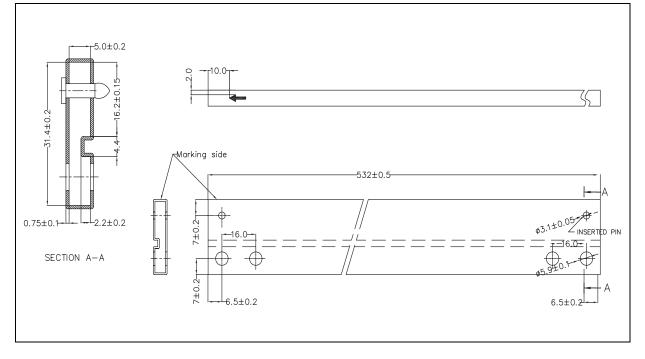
Drawing dimension tube for TO-220 Dual Gauge (mm.)
